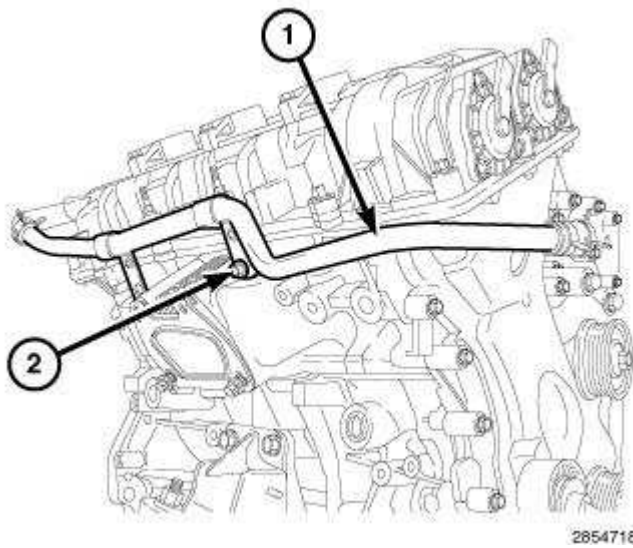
Heater Core Supply Tube Support Bracket & Retaining Bolt
